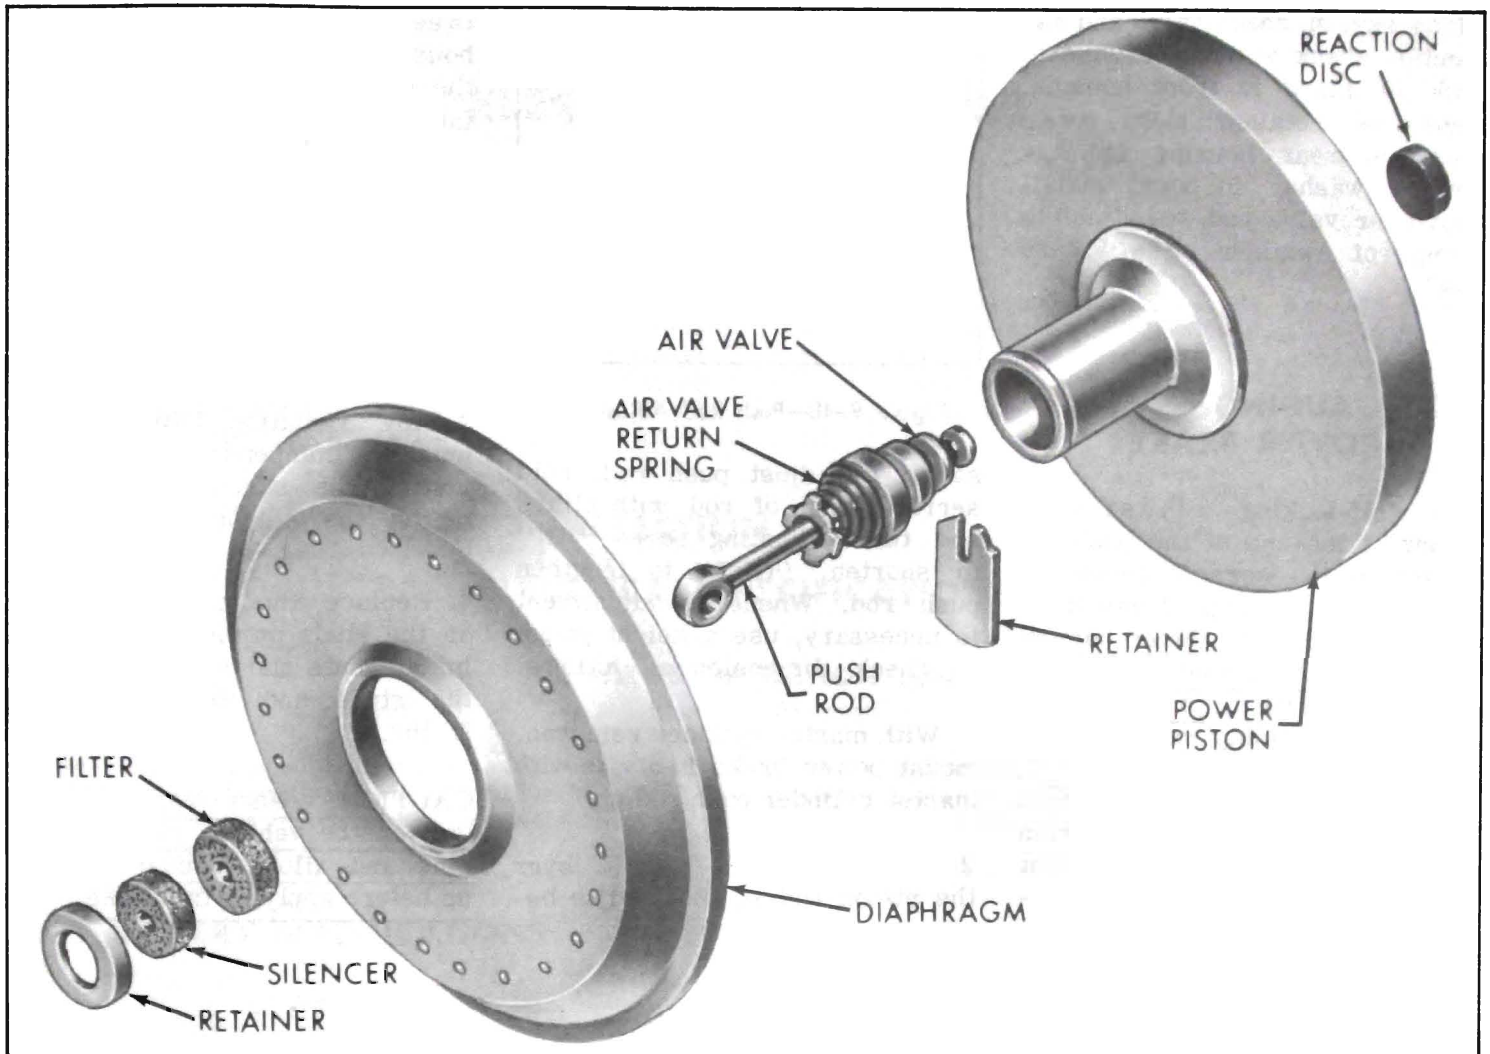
Assembly of Valve and Rod, Lock Key, Diaphragm, Filter and Retainer
